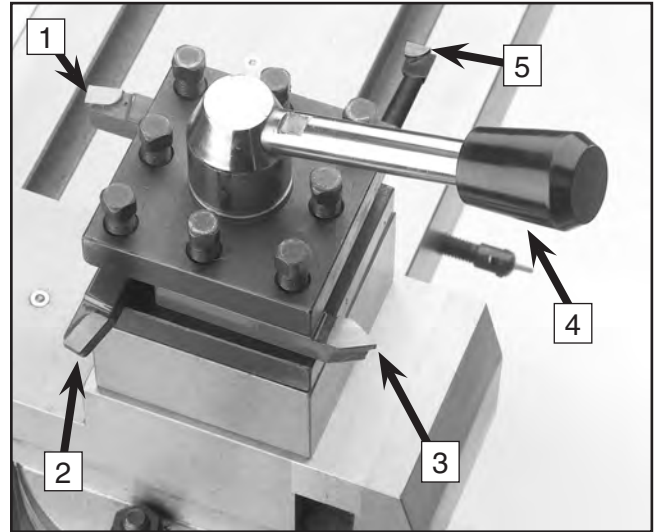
Four cutting tools mounted into the tool post shown with lock lever.
